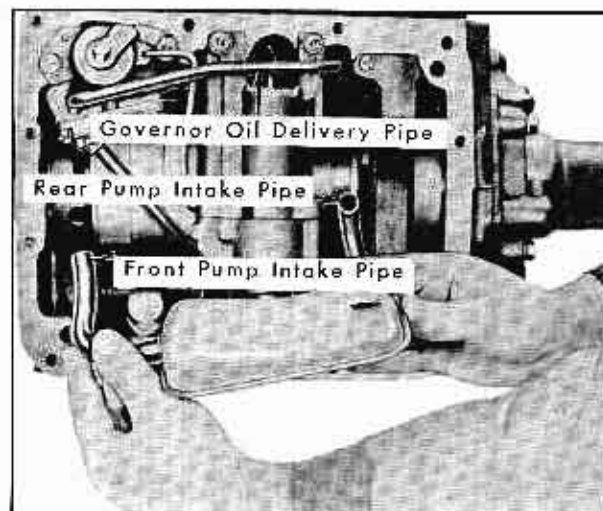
Removing Oil Pan Screen and Intake Pipe
